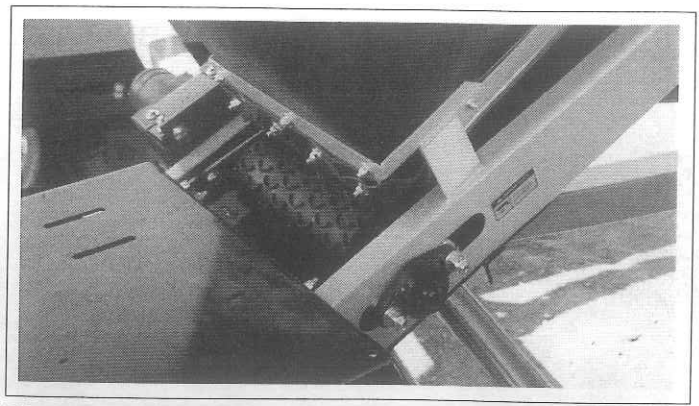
CONVEYOR ALIGNMENT (TYPICAL)
